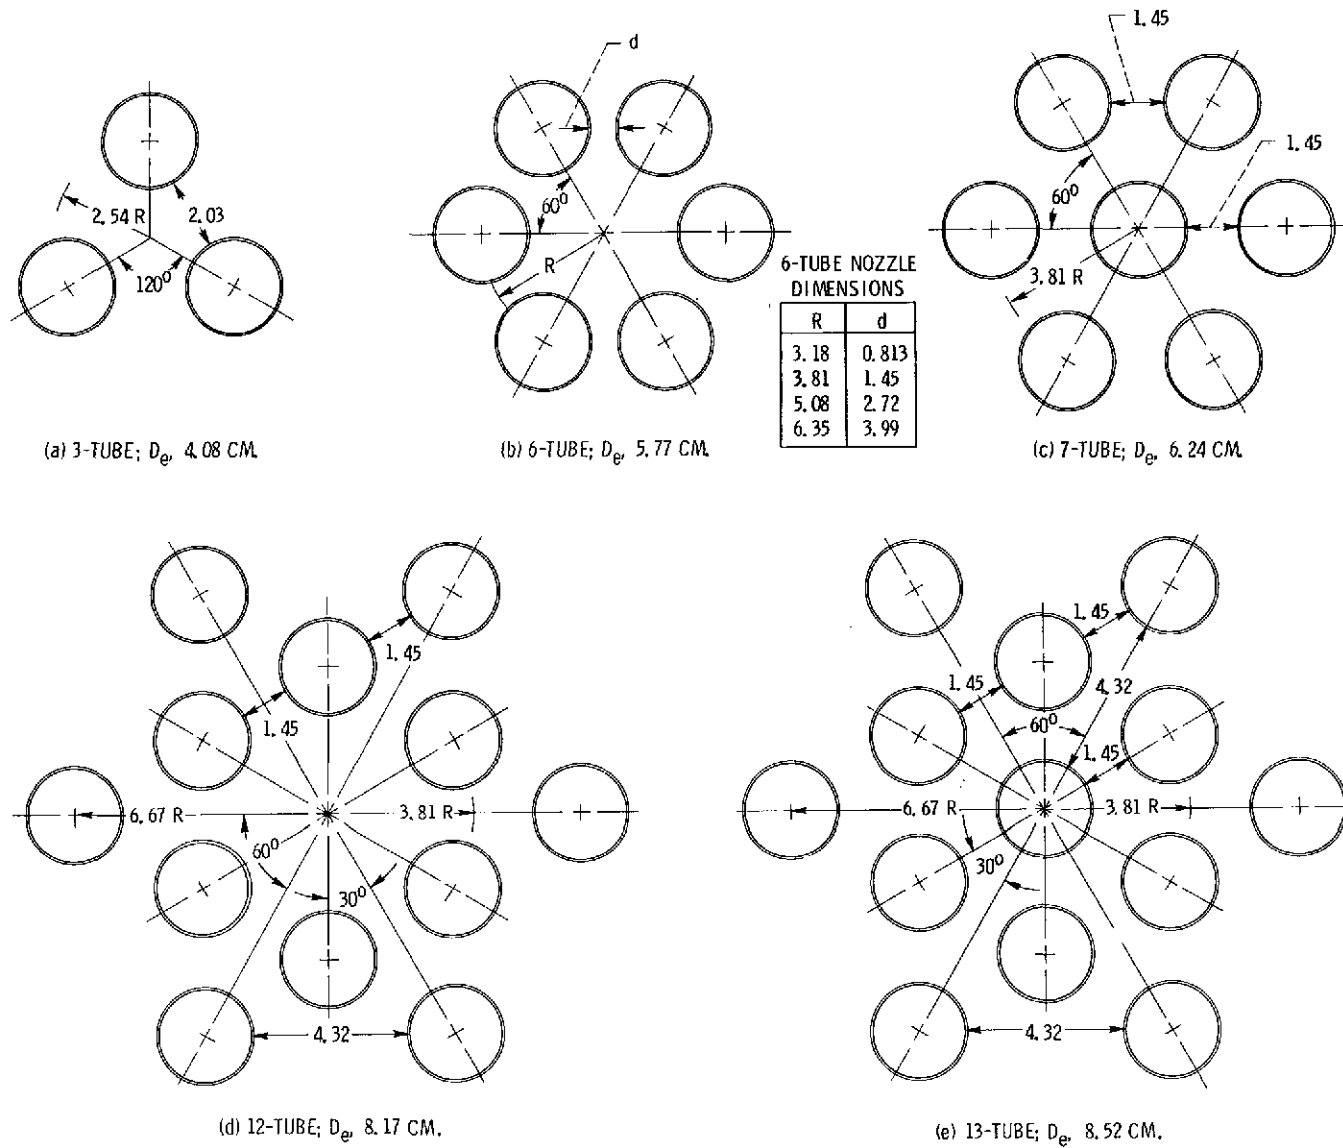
Multitube nozzle configurations tested. All dimensions in centimeters.
